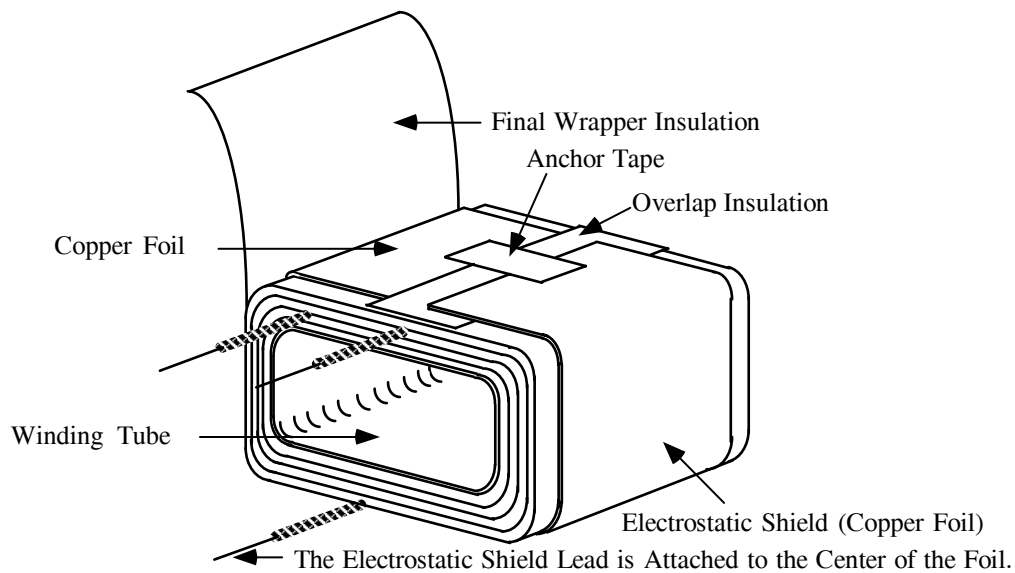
Tube Winding, with an Electrostatic Shield.
